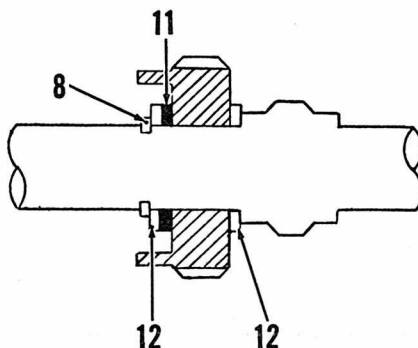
On four speed transmission, third pinion and second gear shims (11) should be installed next to gears with thrust washers (12) next to shaft shoulder and snap ring (8).
